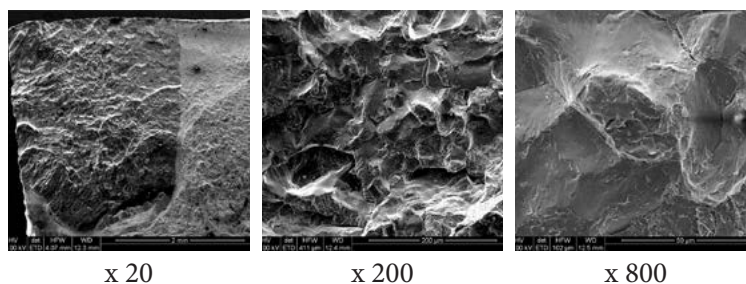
Area of brittle fracture “A” in impact test specimen GS-1
